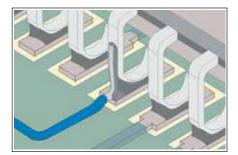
Acceptable* Wire soldered parallel to component lead.
